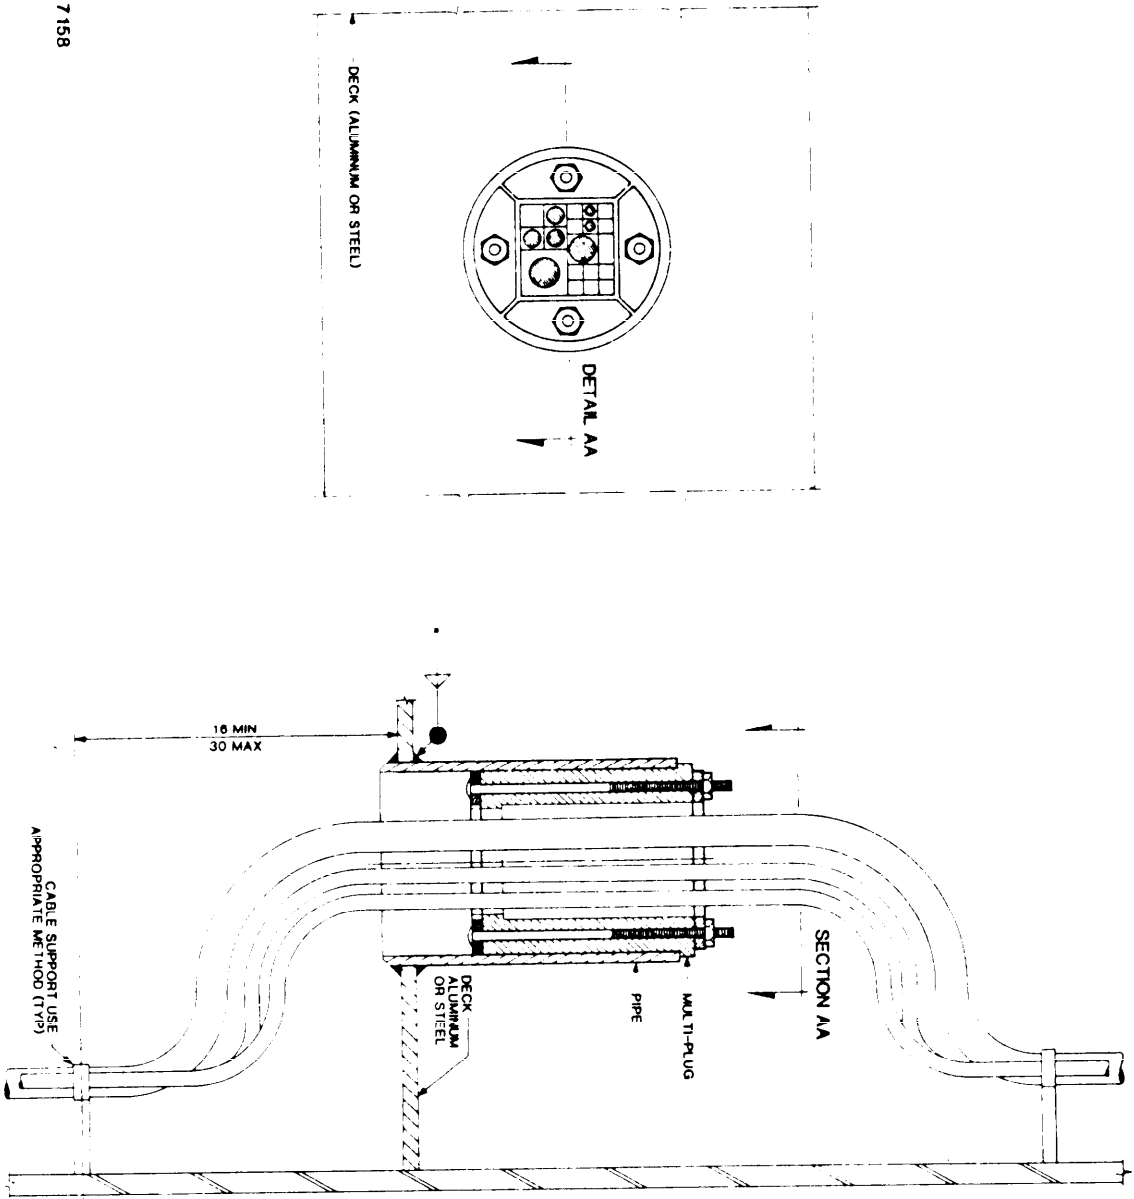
Multiple cable penetrators installation in steel or aluminum decks adjacent to bulkheads.
